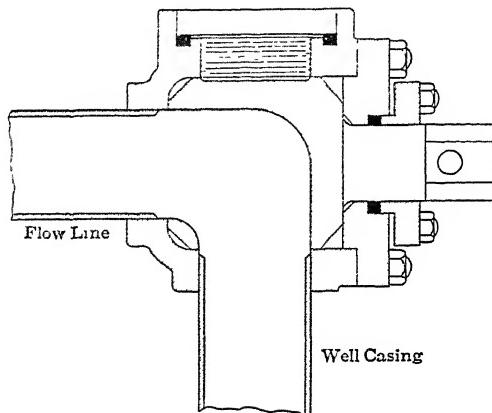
CONTROL CASING HEAD ON WELL SHOWING THE CURVED DEFLECTING SURFACE TO CHANGE GRADUALLY THE DIRECTION OF FLOW AND PREVENT THE MECHANICAL VAPORIZATION OF THE OIL. THE AREA OF THE PASSAGE THROUGH THE CASING HEAD BEING GREATER THAN THAT OF THE CASING INSURES A REDUCED VELOCITY AND PREVENTS FRICTIONAL BACK PRESSURE ON THE WELL.
